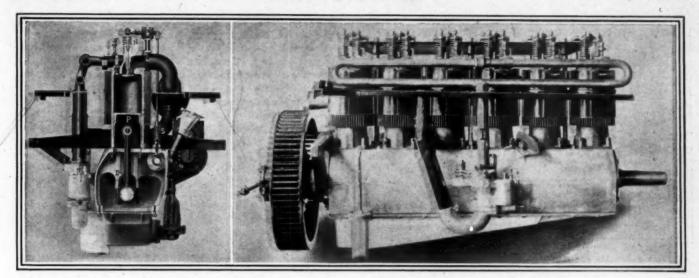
Showing transverse section through motor and a longitudinal view of the intake side.
